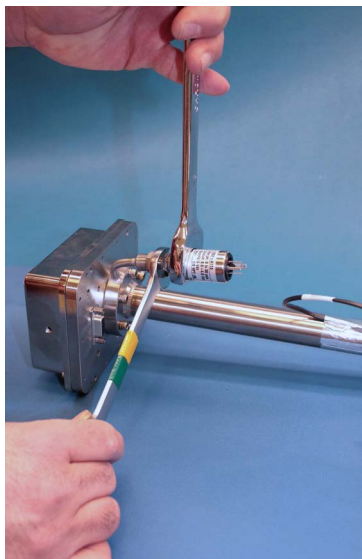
Removed 0.8 m measurement cell with pressure sensor face up
